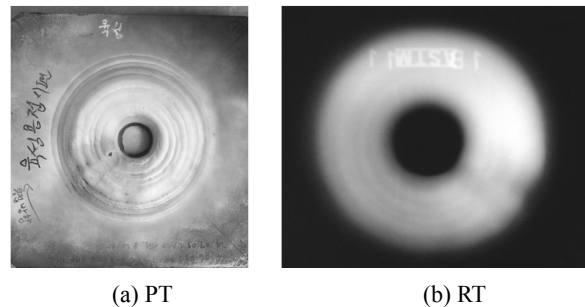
PT (a) and RT (b) test results for Pad overlay weld specimen
